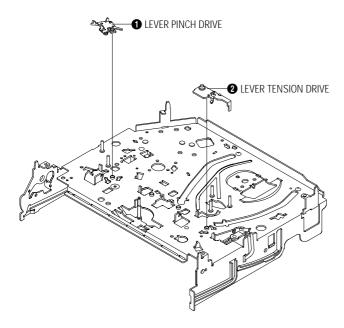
Lever Pinch Drive, Lever Tension Drive Removal
